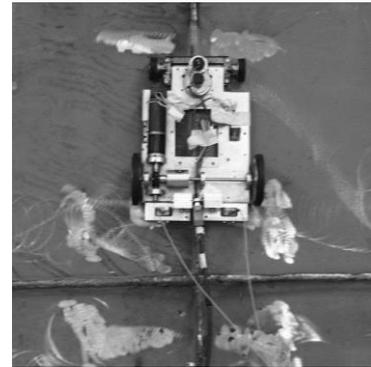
Cross Welds: 20 mm wide, 11 mm proud of the surface with magnetic crawler.
